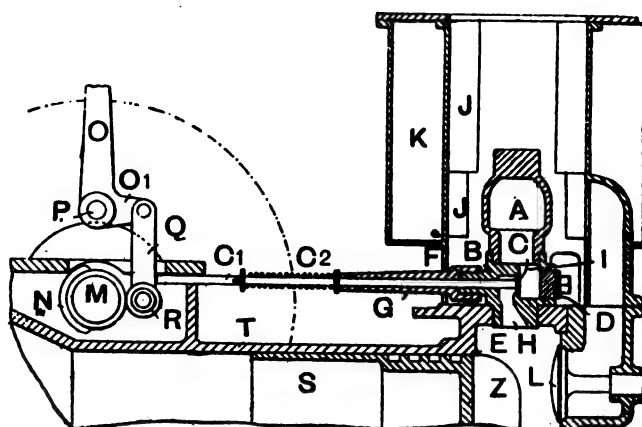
IGNITION DEVICE FOR GAS AND OIL ENGINES.
